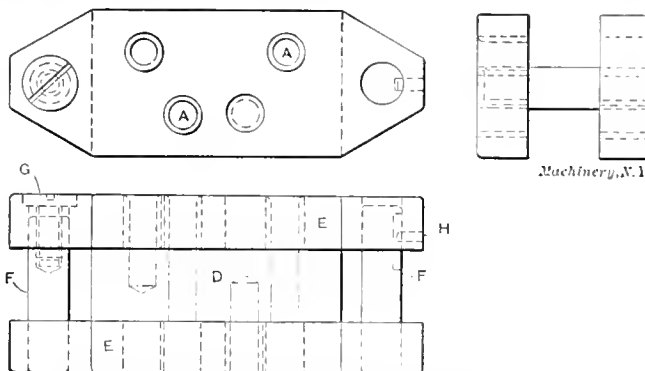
Simplest Form of Closed Jig for Drilling Work in Fig. 83.
